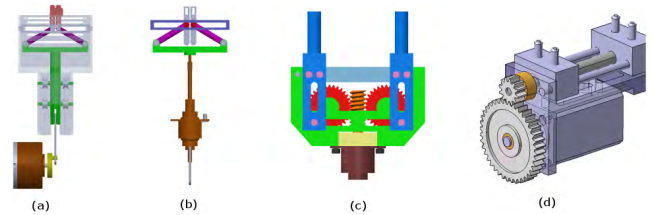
Detail of the development process of the end-effector system: a) Crank-based, b) Linear motor based, c) Endless screw and gears, and d) Bidirectional thread worm screw.
